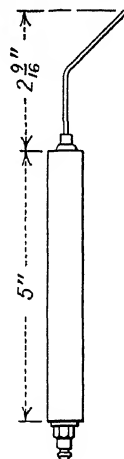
Ignition electrode and insulator; connector is exposed.
